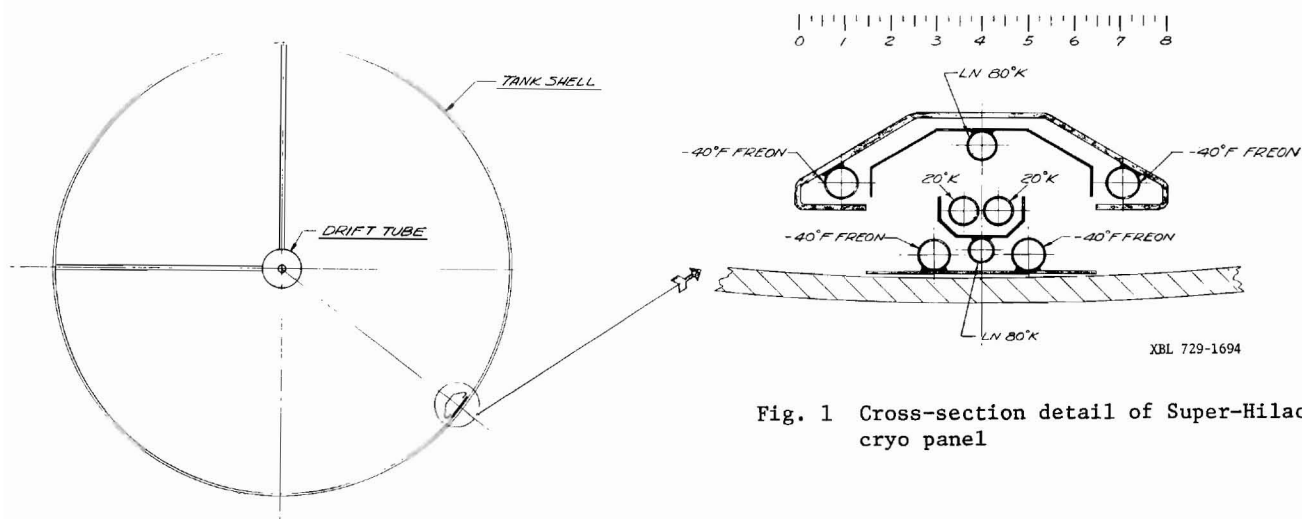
Cross-section detail of Super-Hilac cryo panel
